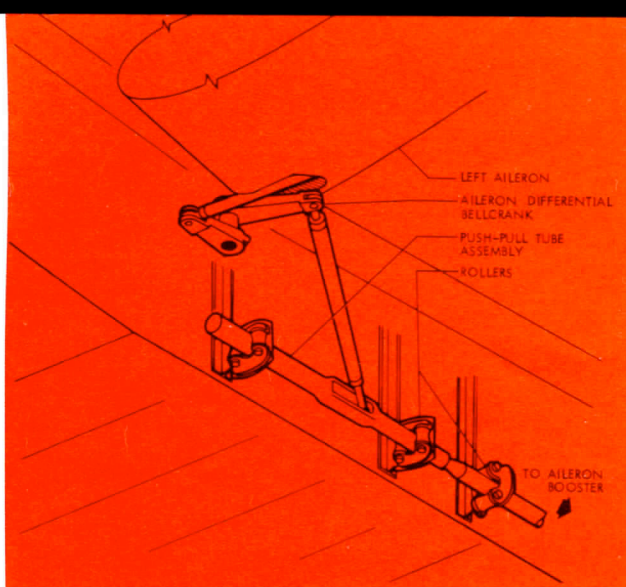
Detail of Aileron Push-Pull Tube Installation in Wing
